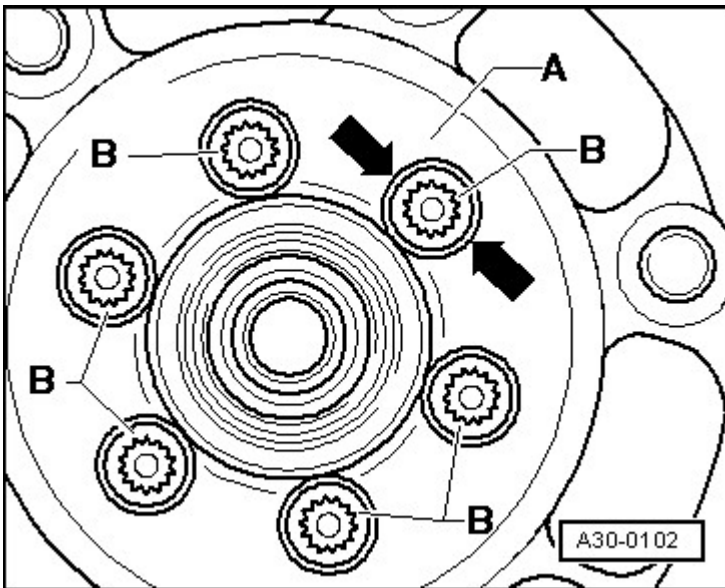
Identifying Dual-Mass Flywheel & Bolts
